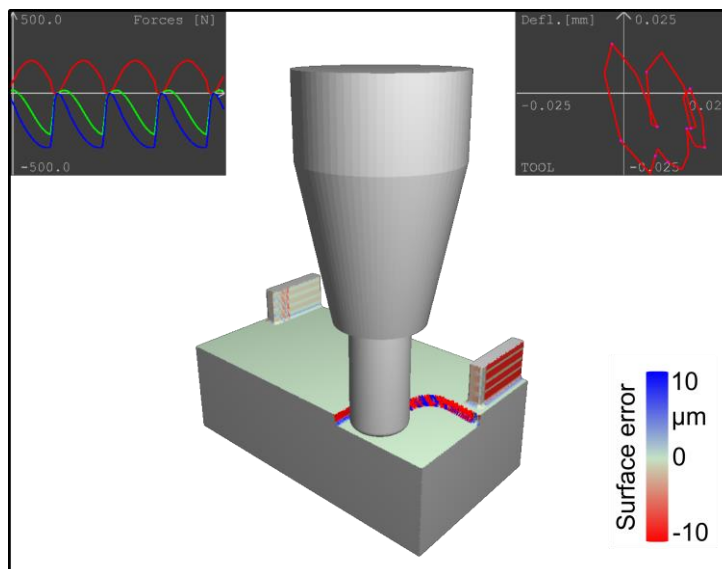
Process simulation of a section of the test workpiece with a visualisation of the current process forces, tool deflections, and the surface errors
